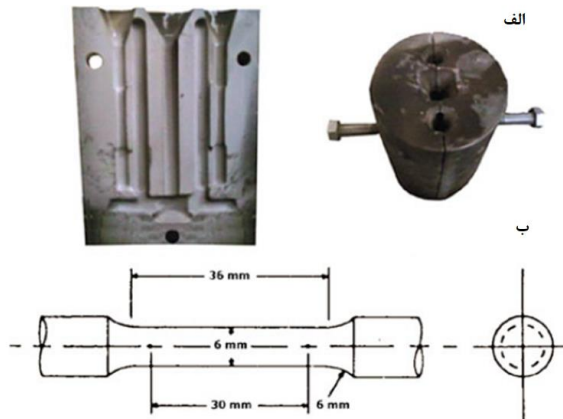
(a) Cast iron mold and (b) tensile sample dimensions .
